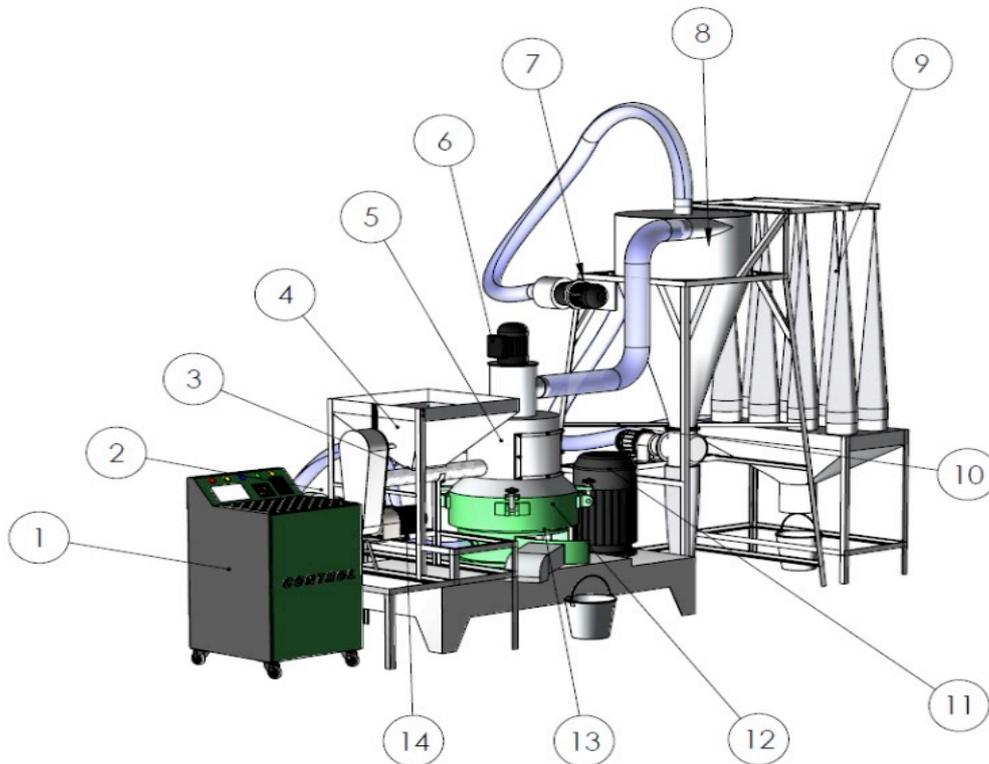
The schematic drawing for centrifugal Mill (1) control panel, (2) suction blower, (3) screw feeder, (4) hopper input, (5) milling room, (6) fan blower, (7) blower cyclone, (8) cyclone separator, (9) dust collector, (10) motor for valve drive, (11) 3-phase motor, (12) milling room, (13) rotors, and (14) screw feeder motor.
